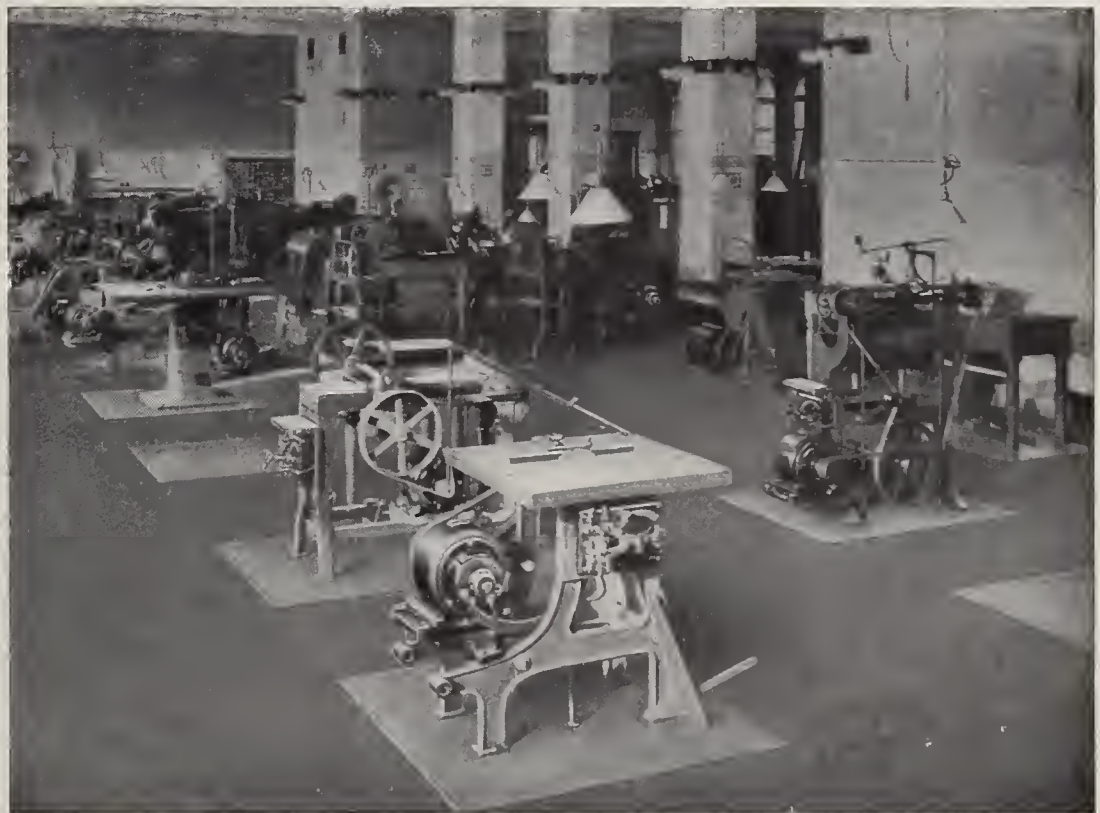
ELECTROTYPING ROOM IN THE GOVERNMENT PRINTING OFFICE AT WASHINGTON, D. C., SHOWING MOTOR-DRIVEN ROUTERS AND OTHER MACHINES. THE MOTORS HERE ALSO WERE SUPPLIED BY THE CROCKER-WHEELER COMPANY
